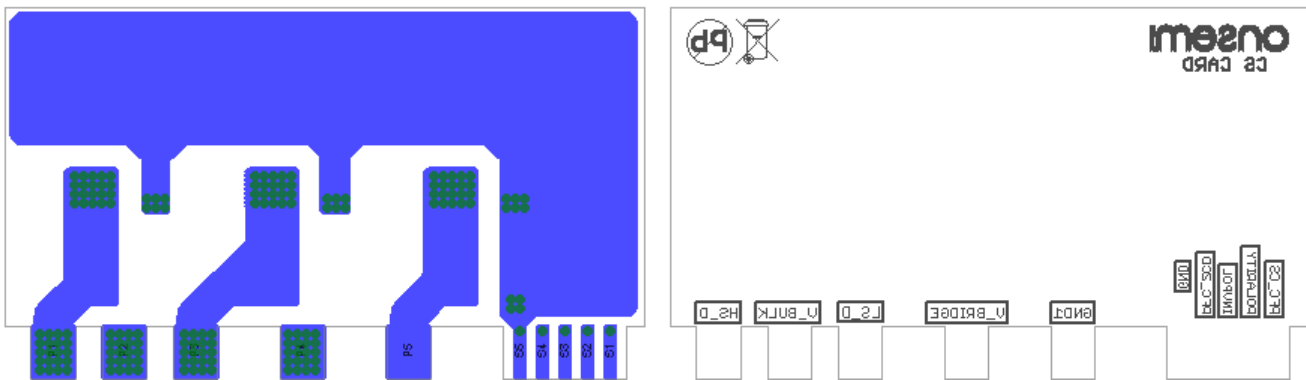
Bottom Layer PCB Layout and Assembly Plan of CURRENT SENSE CARD
